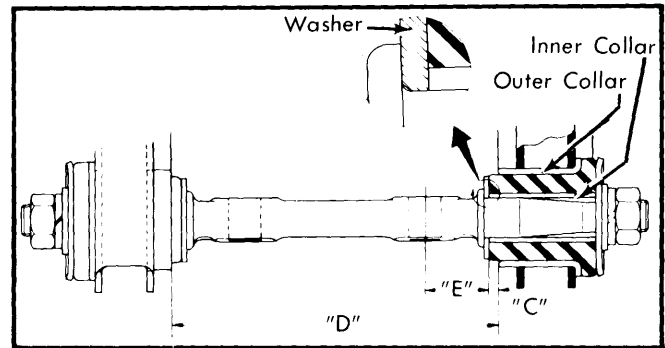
Showing Installed Positions of Bushings for Upper Control Arm
